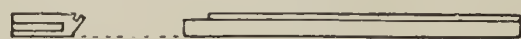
shows how to groove and mold the tail-bar to receive the panel of the back. The bar is mortised into the rocker, with the molding extending over to the bottomside, which will avoid the nail heads which appear in nailed moldings.
